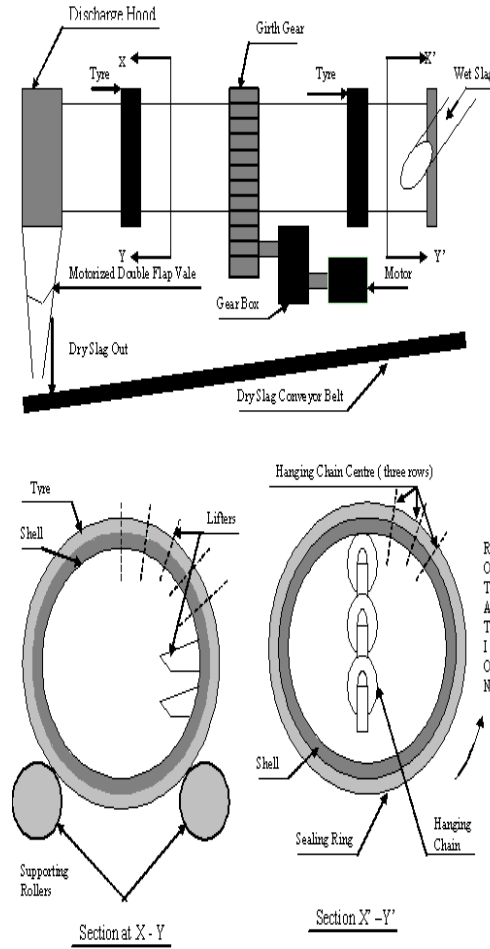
Sketch of General Arrangement of Slag Dryer Plant
